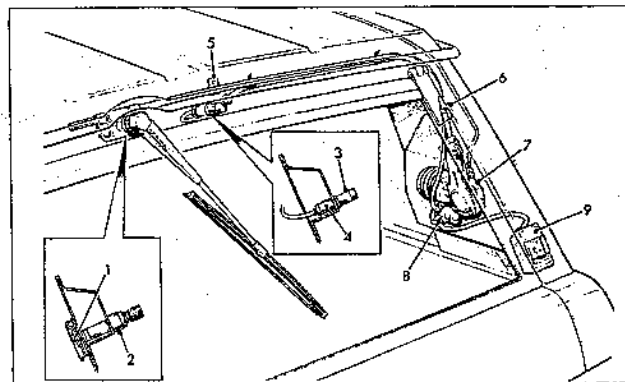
Tailgate wiper/washer layout (early type) (Sec 36)
